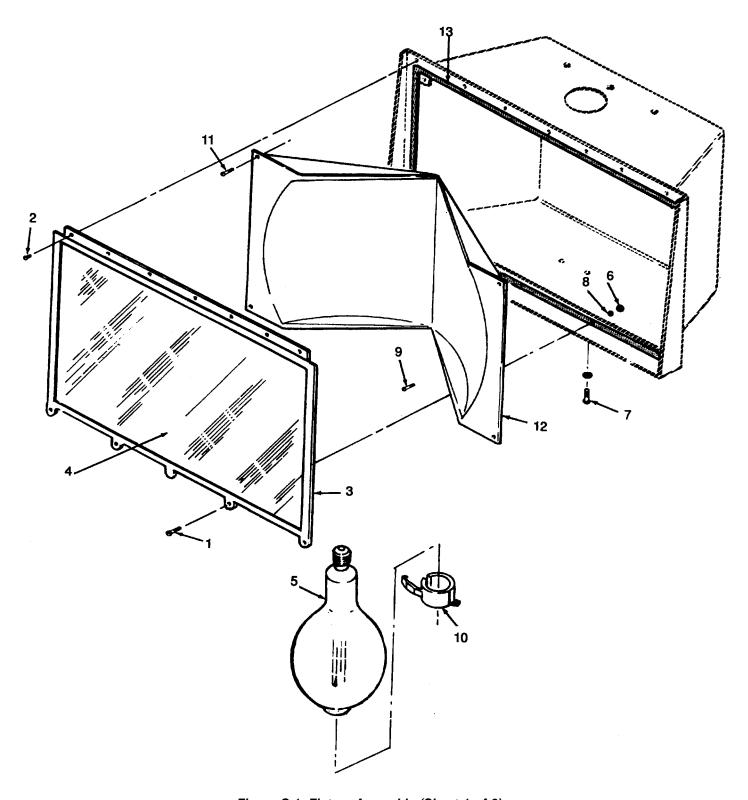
Fixture Assembly (Sheet 1 of 3).
